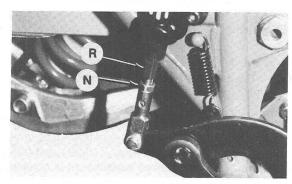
Loosen locknut (N) and rotate actuator rod (R) to adjust brake pedal height.
